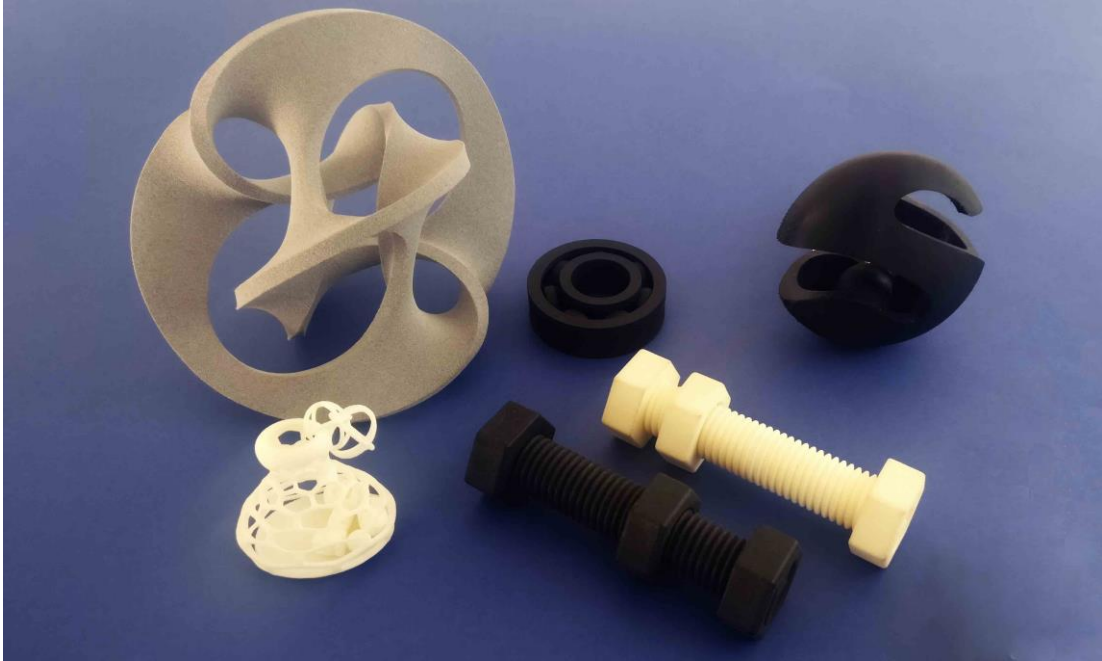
Examples of objects which are impossible to produce (in one piece) by traditional manufacturing techniques [17]
